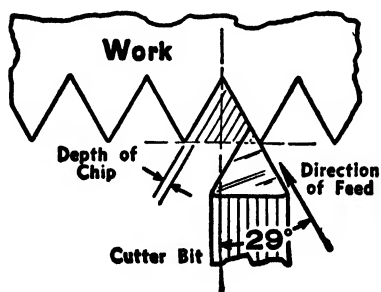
Action of the thread-cutting tool when the compound rest is set at 29 deg. (South Bend Lathe Works)
